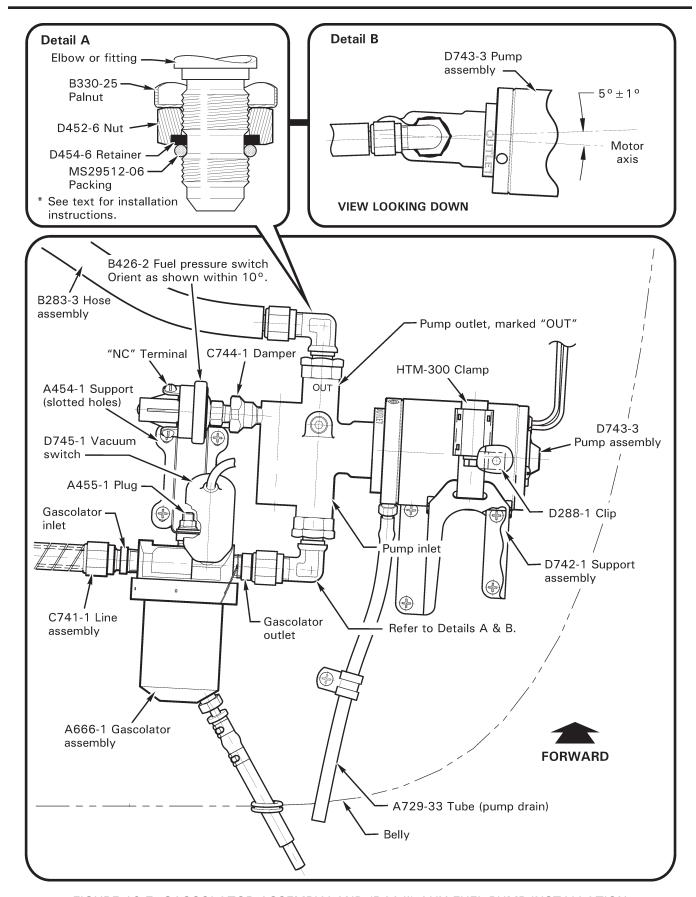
GASCOLATOR ASSEMBLY AND (R44 II) AUX FUEL PUMP INSTALLATION
